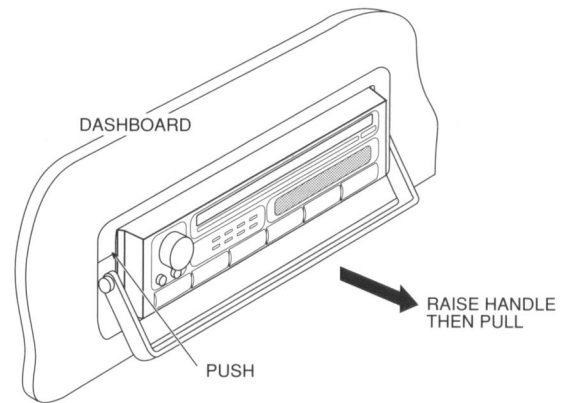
Removing the CD-303 chassis from the Mounting Sleeve.
